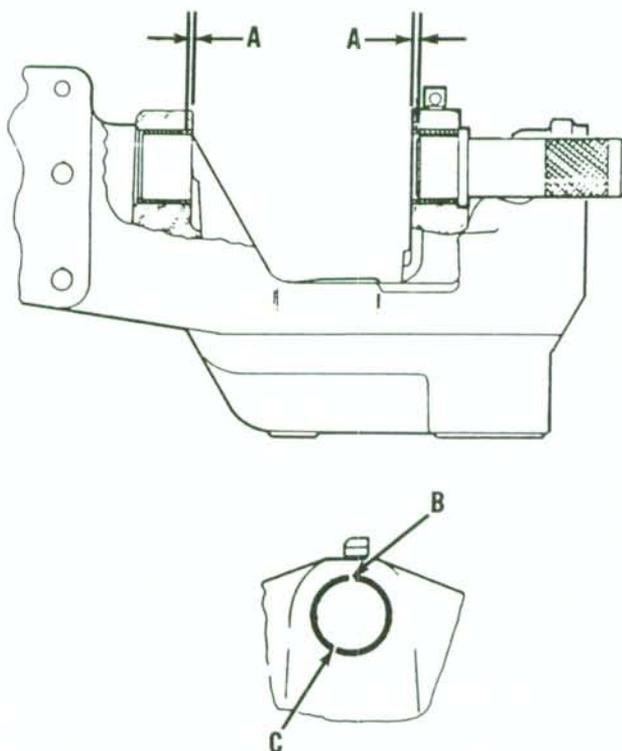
Axle pivot bushings should be installed as shown for 340-360 models. Hole (B) should be aligned with grease passage and slot (C) should be in position indicated.
